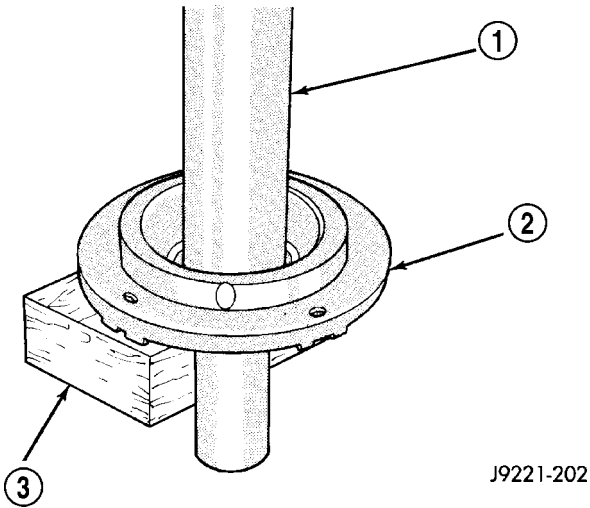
FRONT BEARING CUP IN RETAINER
